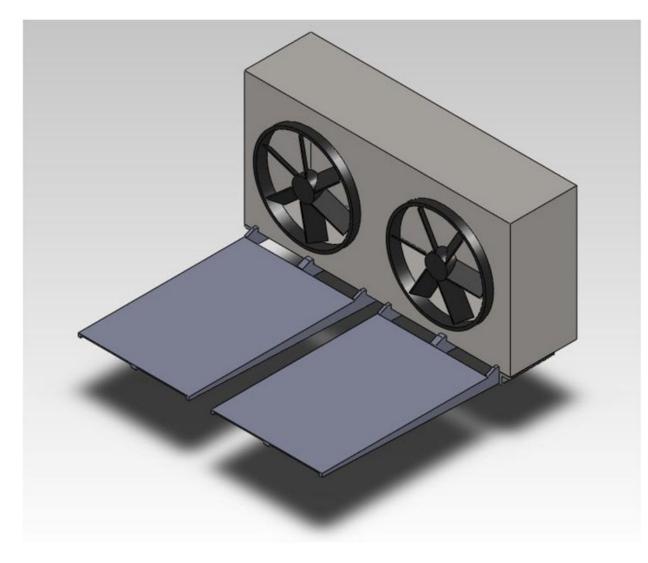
Suggested fan assembly with horizontal deflector design and spacer.
